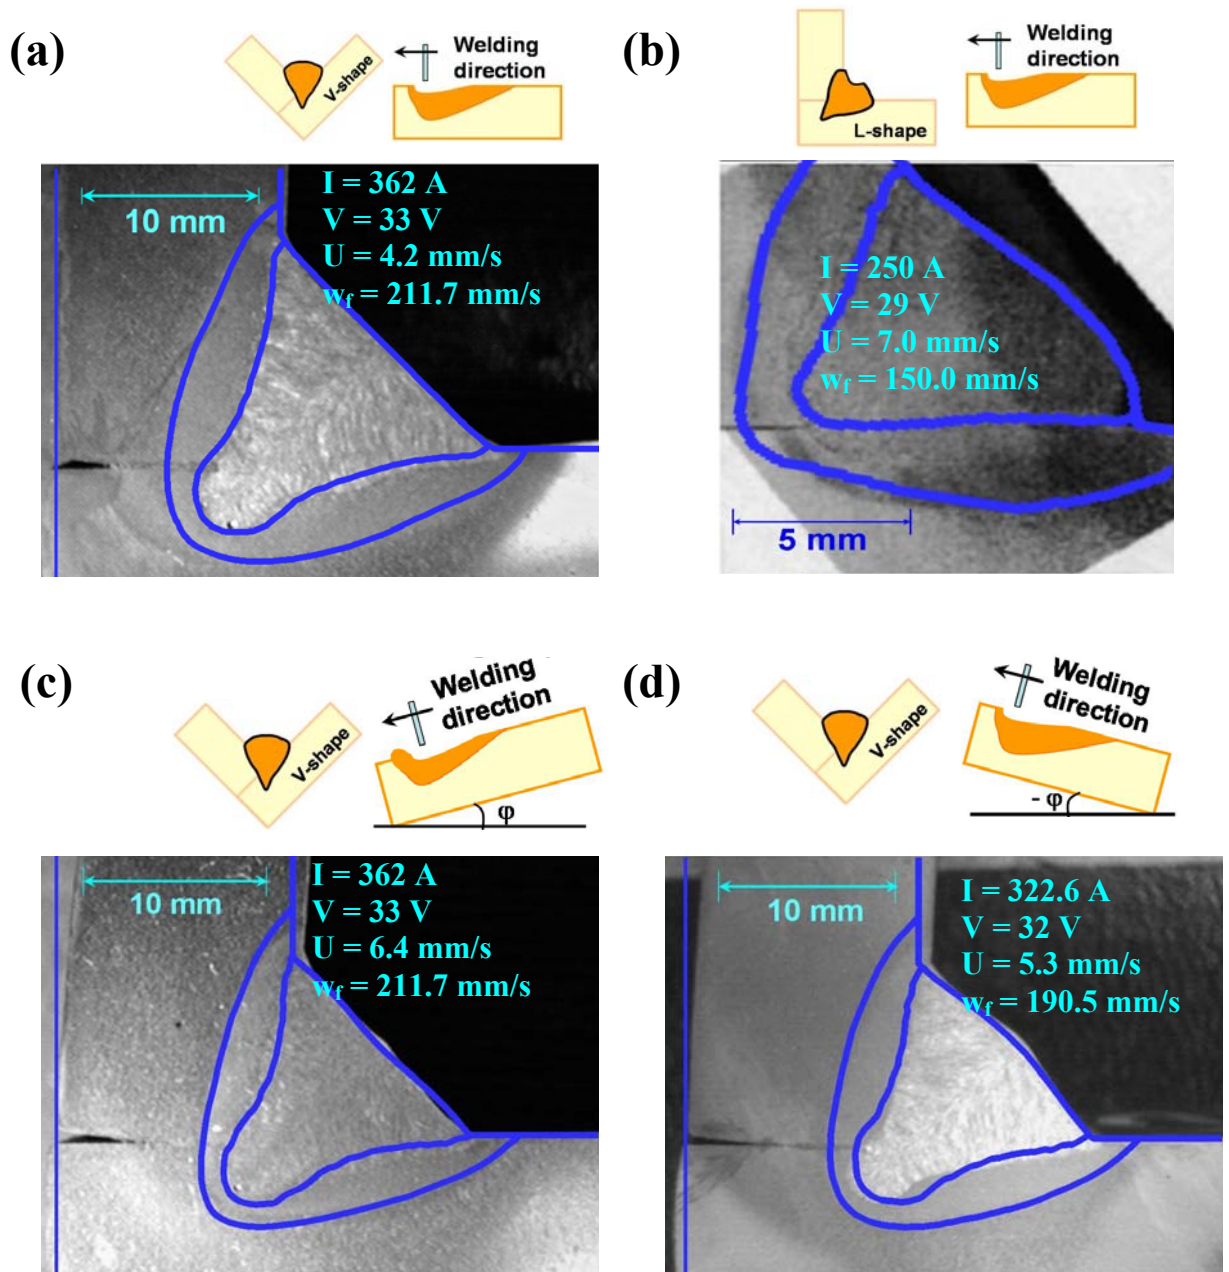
Comparison between the calculated and experimental weld geometry during GMA welding of (a) V-shape symmetric fillet joint; (b) L-shape symmetric fillet joint; (c) downhill welding at lift angle = 6° and (d) uphill welding at lift angle = -4° . The experimental micrograph in figure (b) is taken from reference [21]. Since the wire feed rate was not mentioned in the experimental conditions for this micrograph, a value of 150.0 mm/s is chosen in the simulation based on the arc current value. The inner isotherm (blue line) in all these figures represents the calculated weld pool boundary based on solidus temperature of 1745K, while outer isotherm (blue line) represents the 1073 K temperature.
